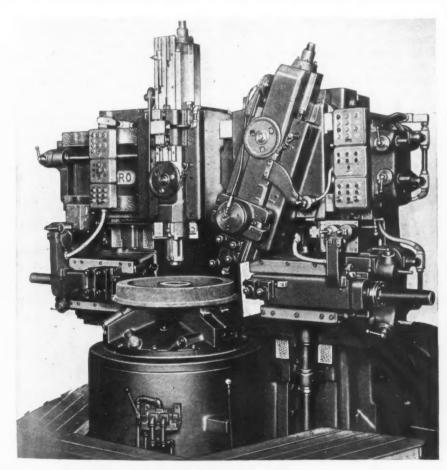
Automatic Car-wheel Boring Mill Built by Cincinnati Planer Co.
